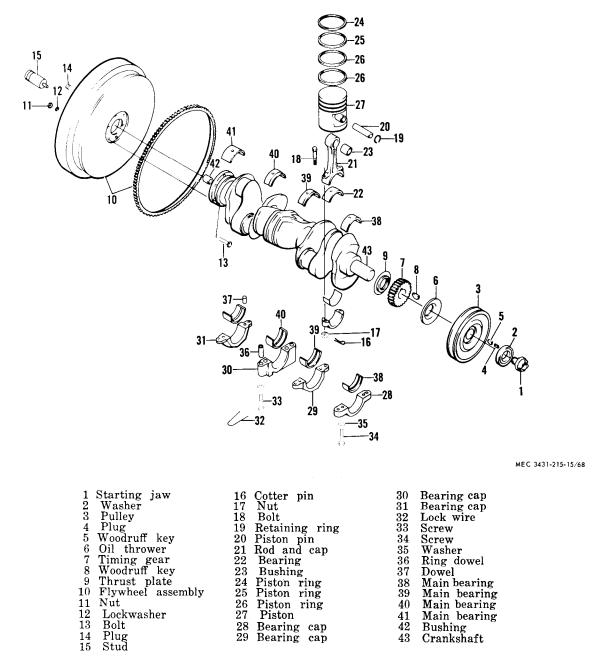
Crankshaft, flywheel, and piston assembly, assembly and disassembly.
